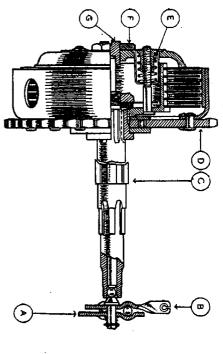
Clutch-operating Mechanism—B.52 Type.
